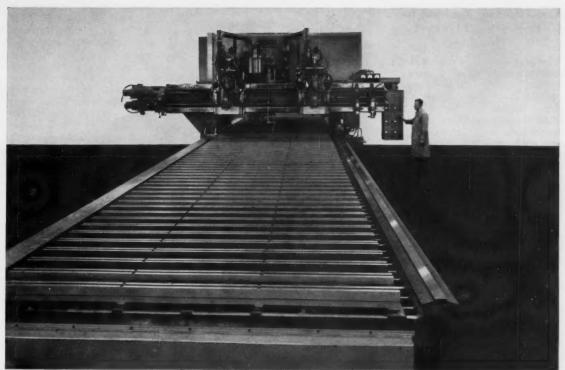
Huge aircraft skin-, spar-, and profile-milling machine built recently by the Onsrud Machine Works, Inc.
